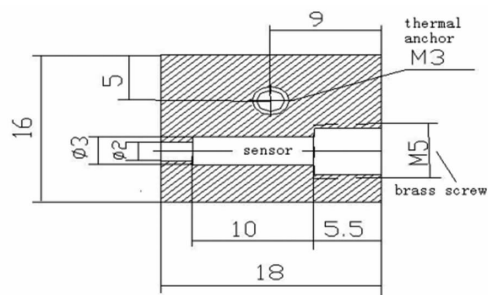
Mounting substrate of Cernox-1050-AA thermometer
